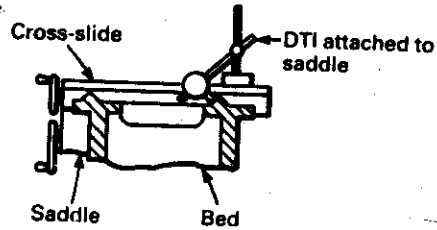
Testing the parallelism of slide-ways of a lathe
